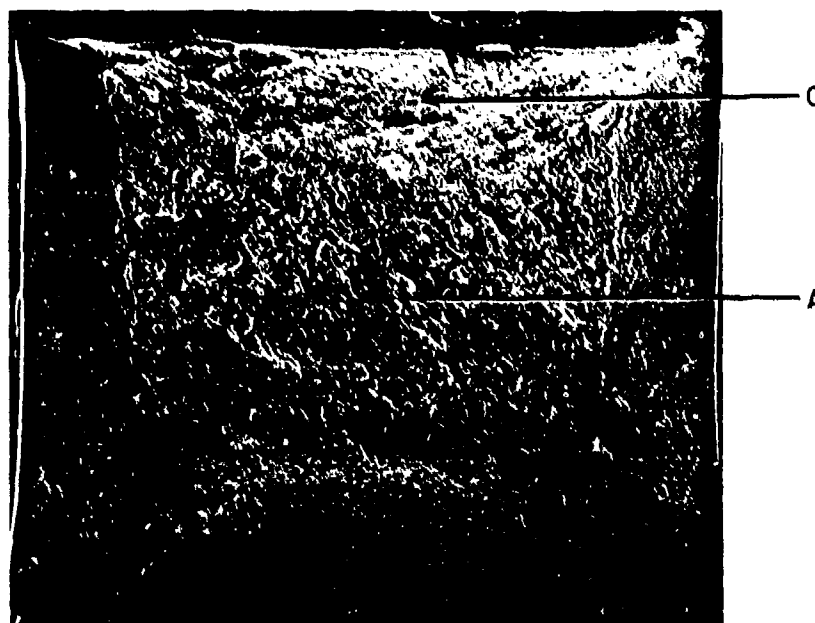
Fracture surface of an HY-130 Charpy specimen tested at -83°C , 10x.
